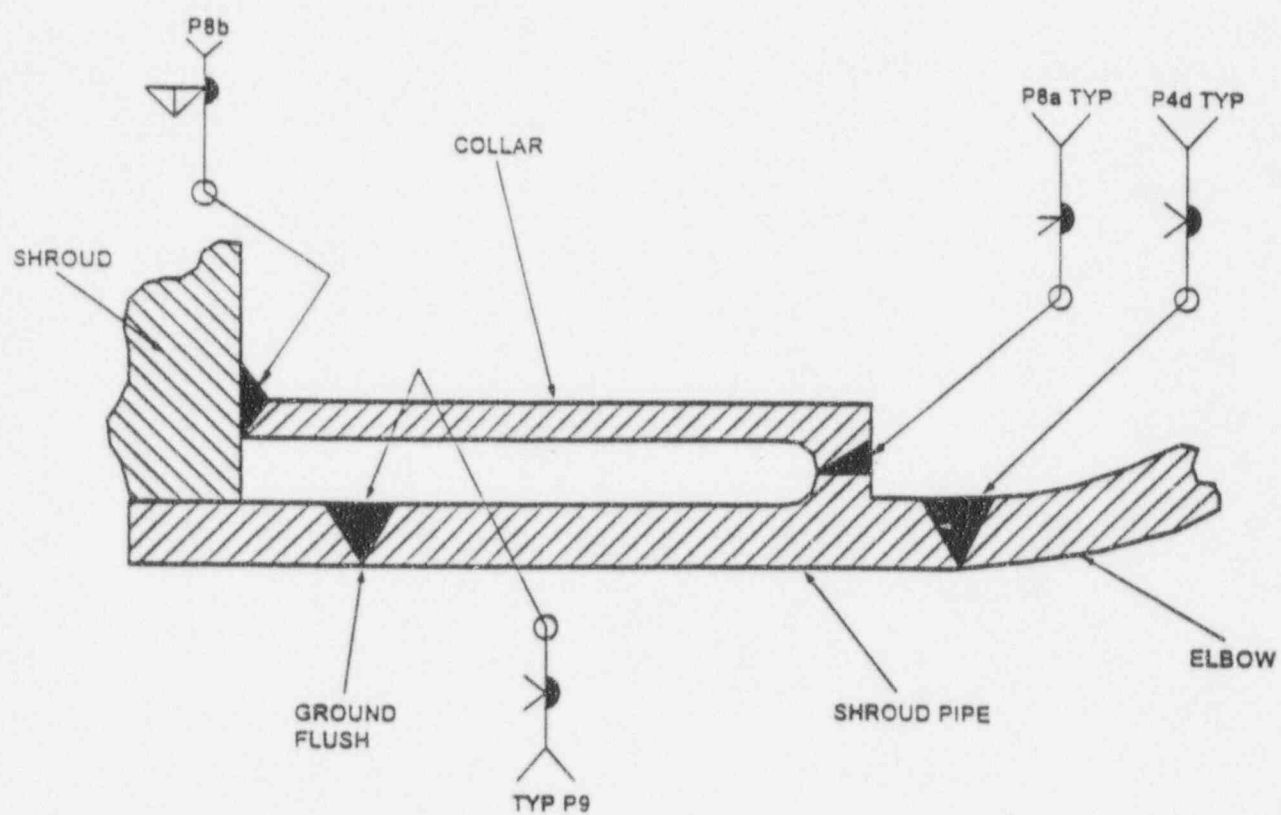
Attachment Weld Configuration (Reference 1)
